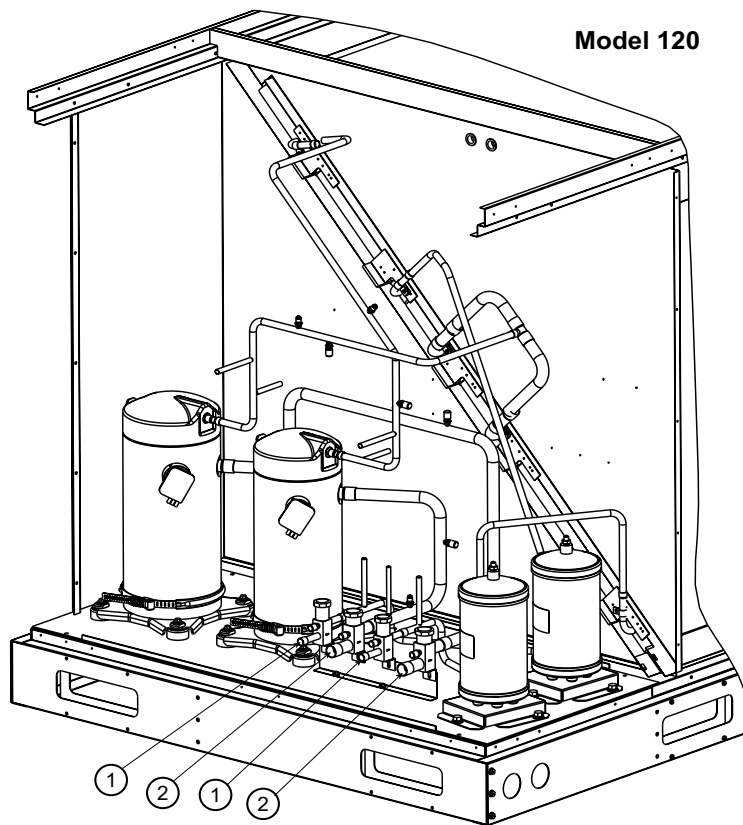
Shutoff Valves—Model 120 (Refer to [Table 12](#))
